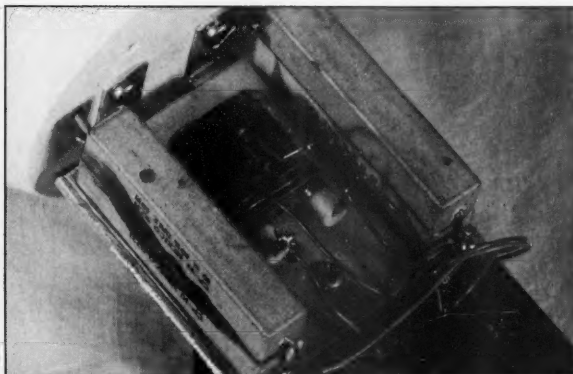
Photo C. Detail of the inner oven heater assembly. Note the heater resistors, crystal, and thermistor. The assembly is mounted to the top of the thermos bottle and to the end of the oscillator board prototype.
